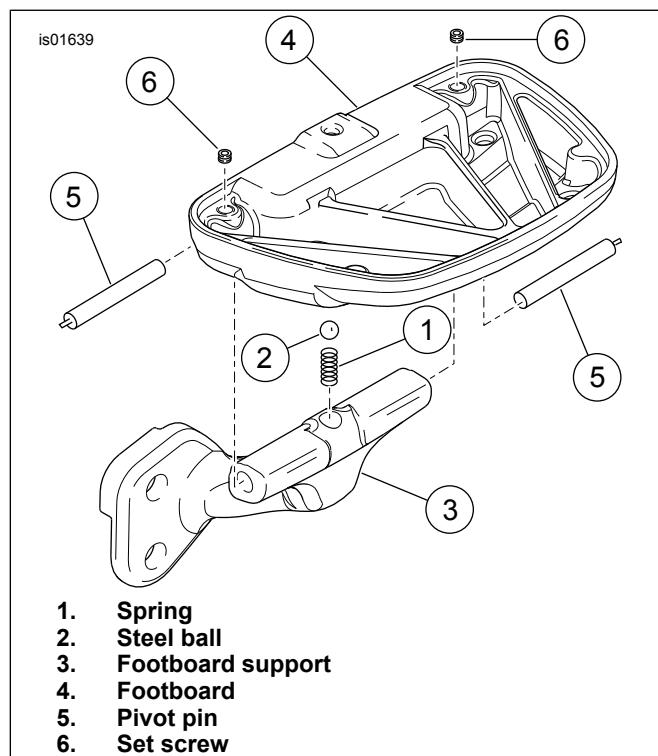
Typical Footboard-to-Support Assembly (1994 - 2001 Footboard Support Shown)
